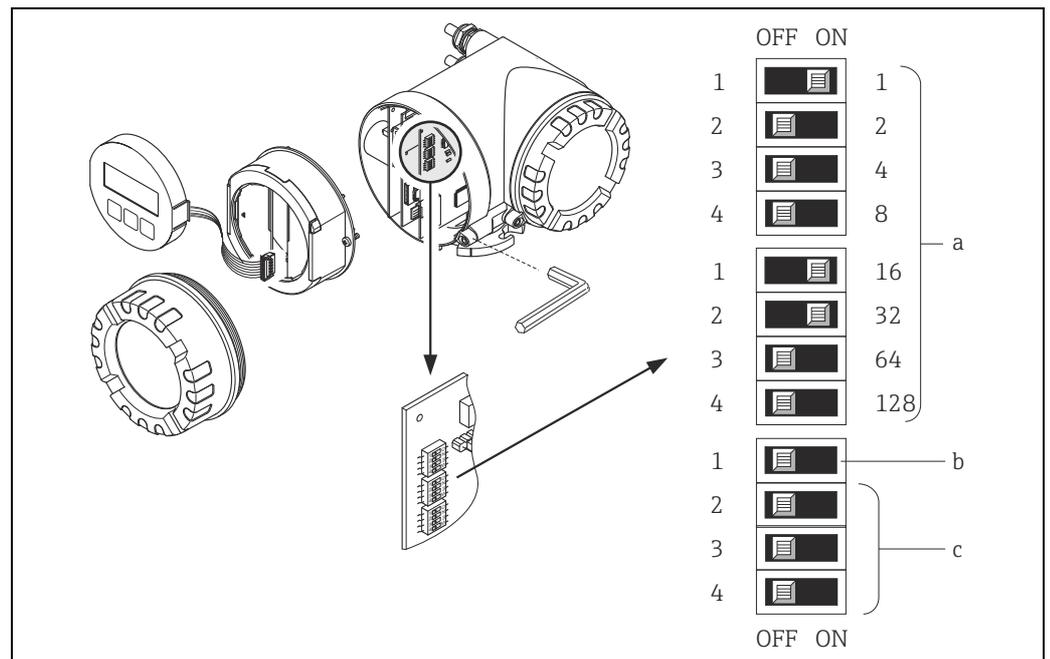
Addressing with the aid of miniature switches on the I/O board
